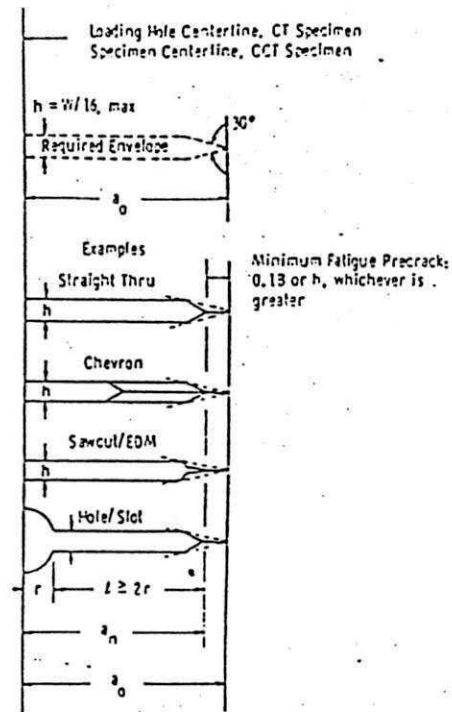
Notch Details and Minimum Fatigue Precracking Requirements
